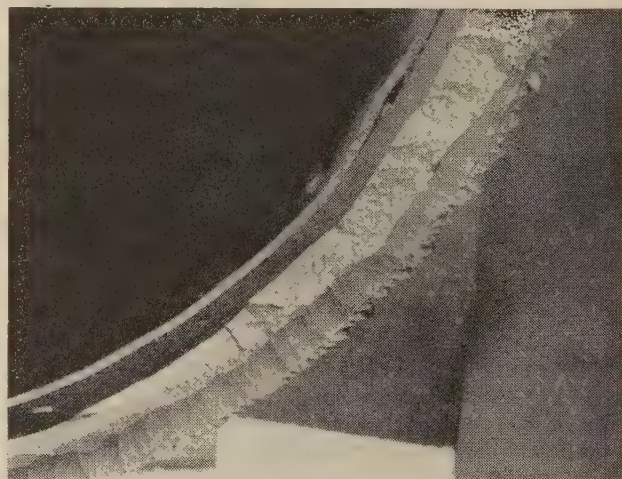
DETAILED VIEW OF TEST SPECIMEN AFTER FRACTURE
